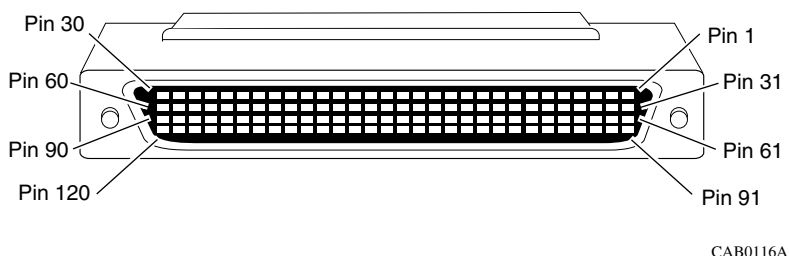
120-pin to Quad 44-pin Adapter Assembly
